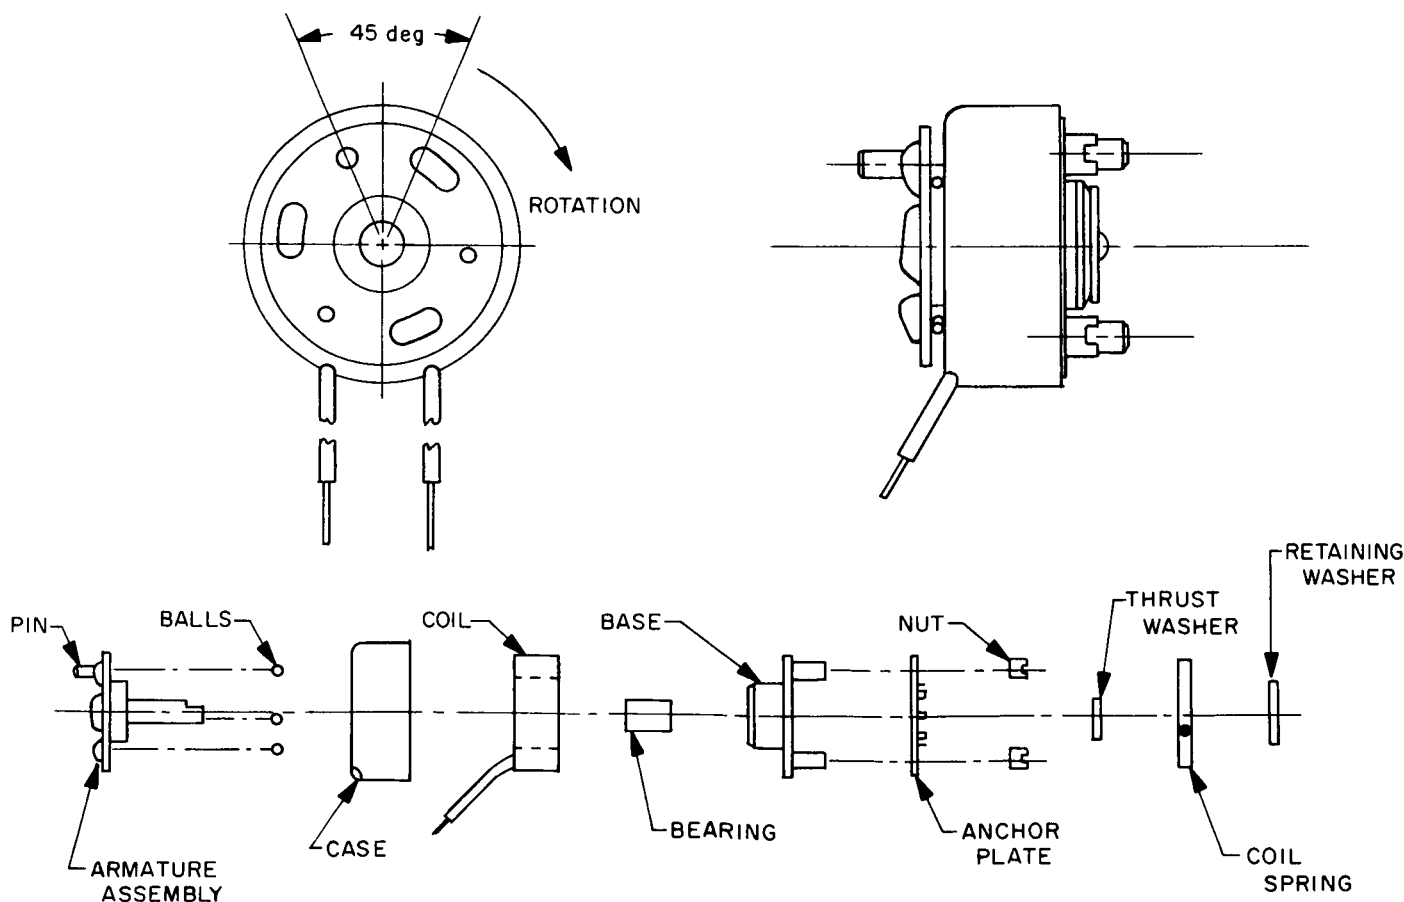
Rotary solenoid, *Mariner C* TV shutter (exploded view)
